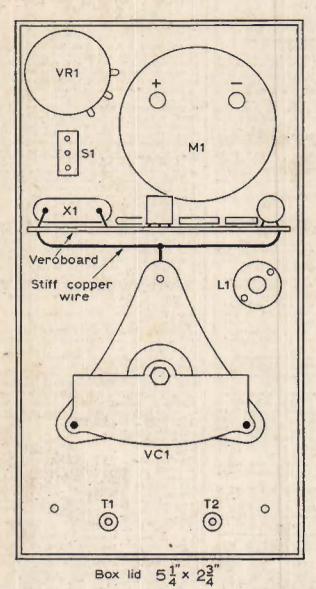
Layout of the checker Mk II. In the Mk I version the circuit board and switch S1 are omitted and an input socket fitted.
